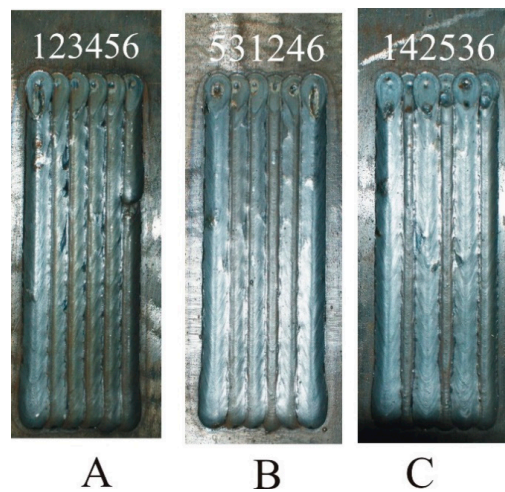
Photographs of plates with padded welds marked by a sequence of beads.
